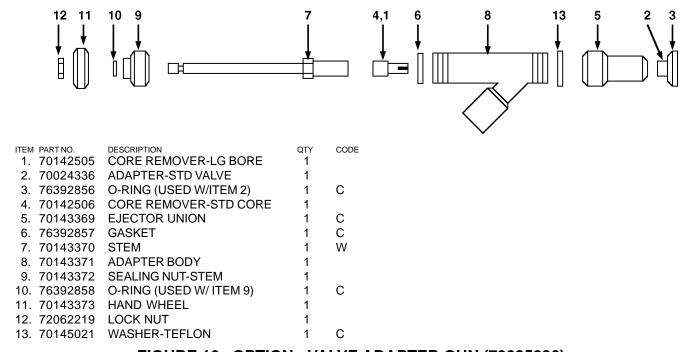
OPTION - VALVE ADAPTER GUN (79085286)
